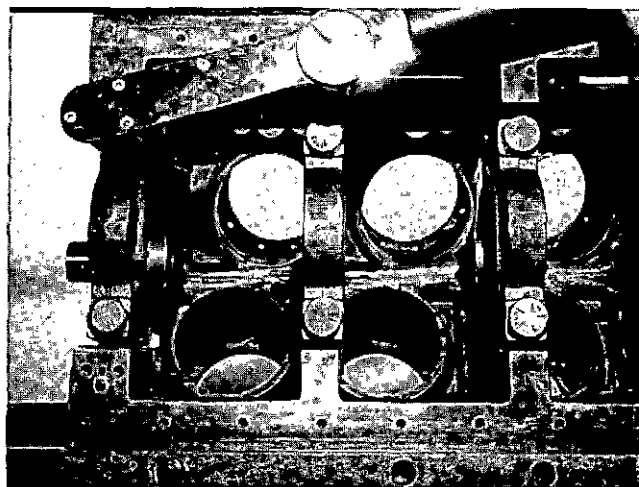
, V40126. Tightening main bearing capscrews
